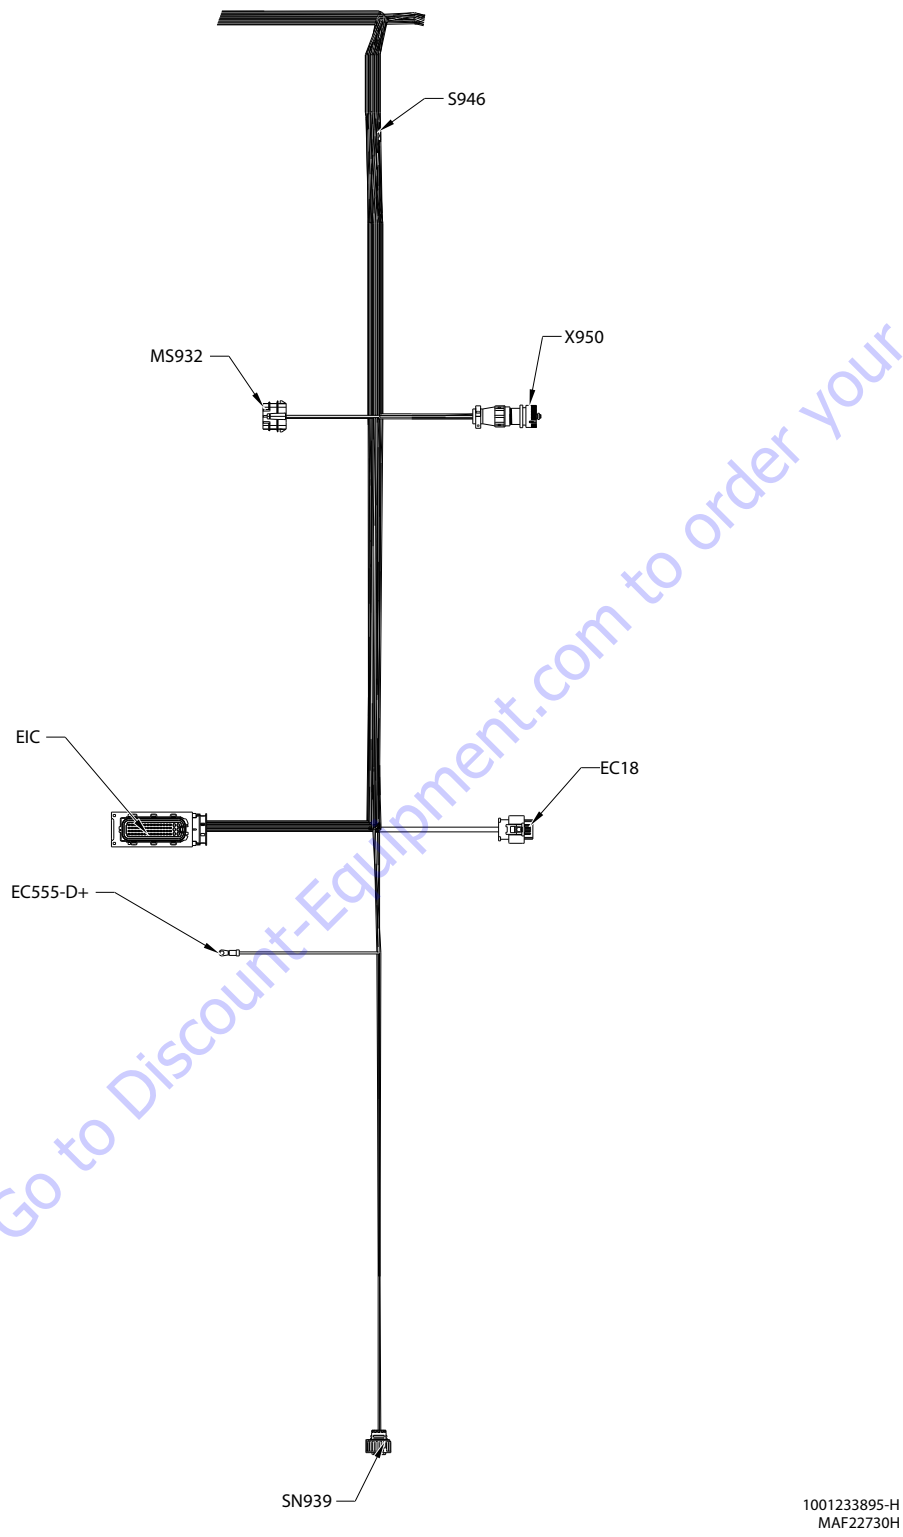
Deutz T4F Engine Harness - Sheet 3 of 5
